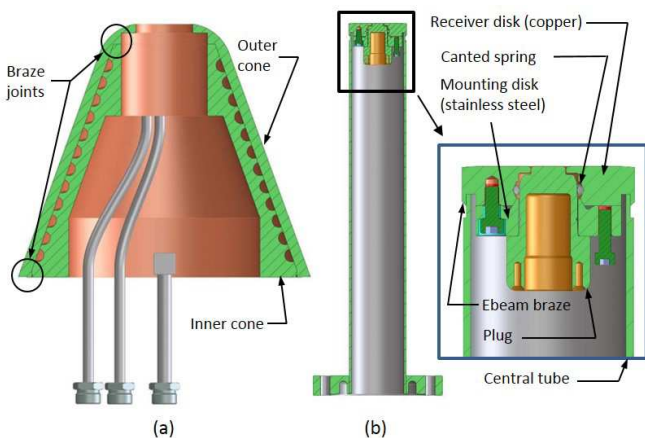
(a) Cross-section 'nose' cone brazement, (b) Cross-section of central tube subassembly.
